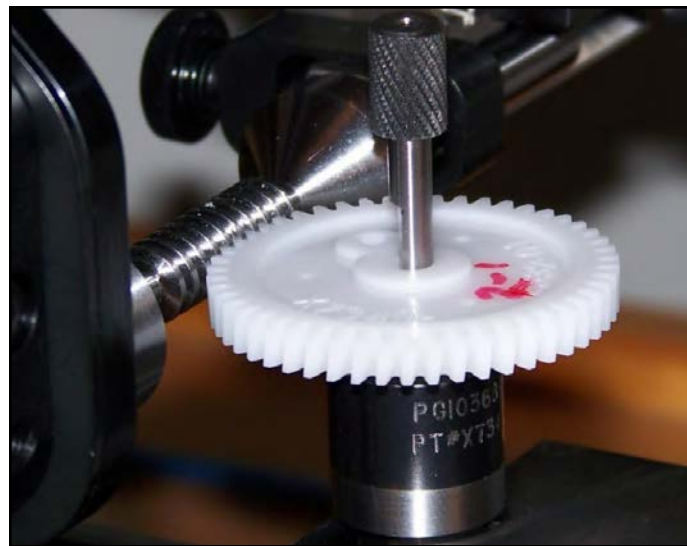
Master worm in double-flank mesh with a plastic helical gear (courtesy of Web Gear Services Ltd.).
